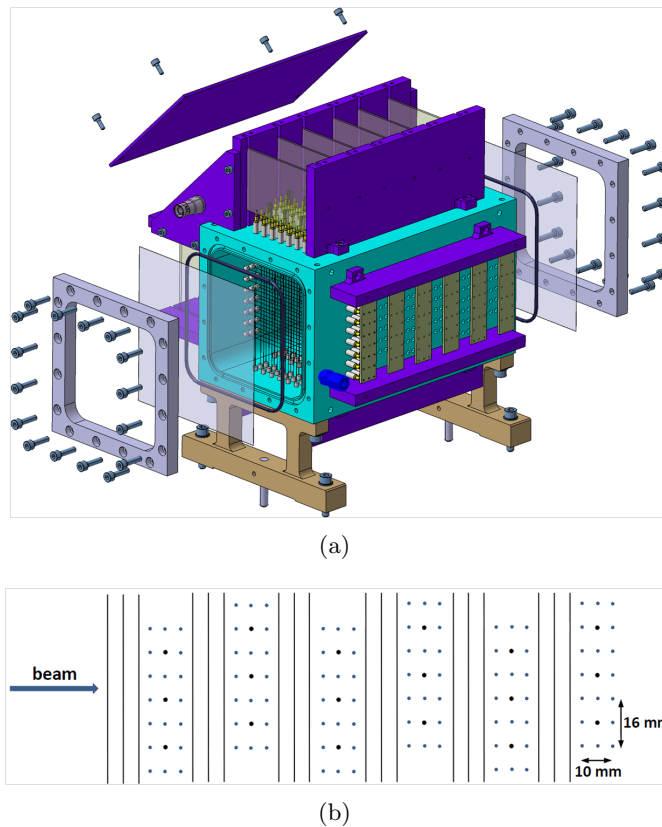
Technical drawing (a) and cells layout (b) of the Beam Monitor drift chamber.
